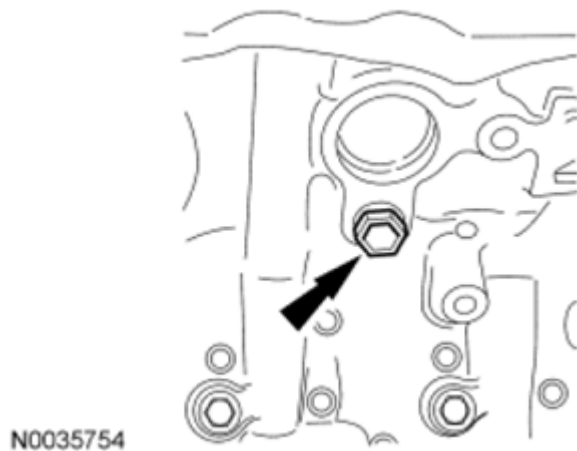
Locating Engine Block Drain Plug And Mounting Bolt
